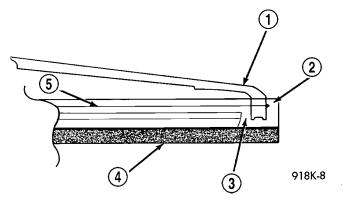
WIPER BLADE ELEMENT - TYPICAL
